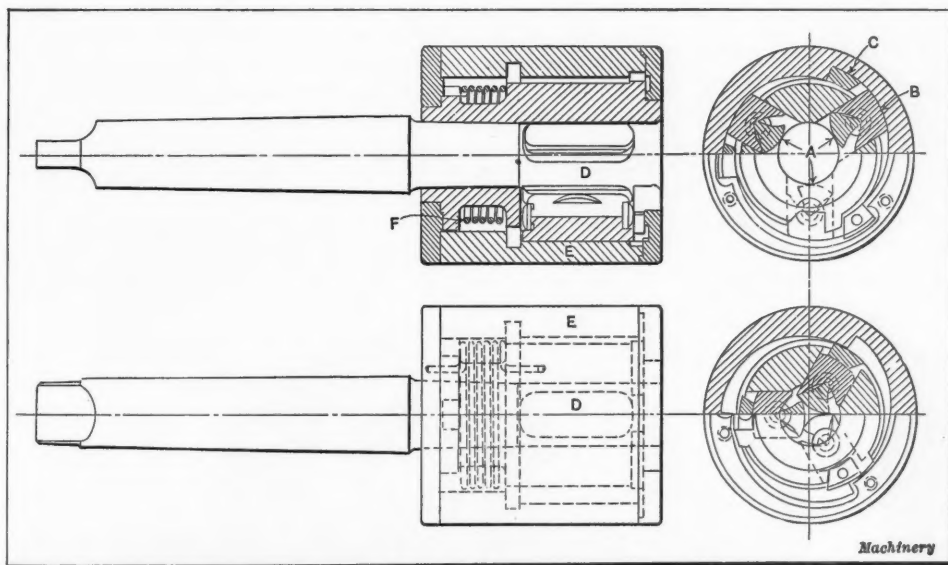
Cross-sectional View showing Arrangement of Gripping Mechanism
